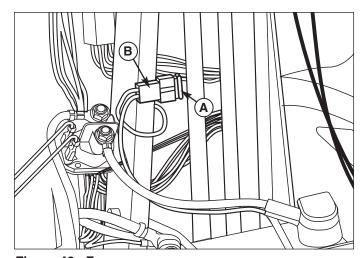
Fuse A. Fuse, 20-amp B. Fuse Holder
